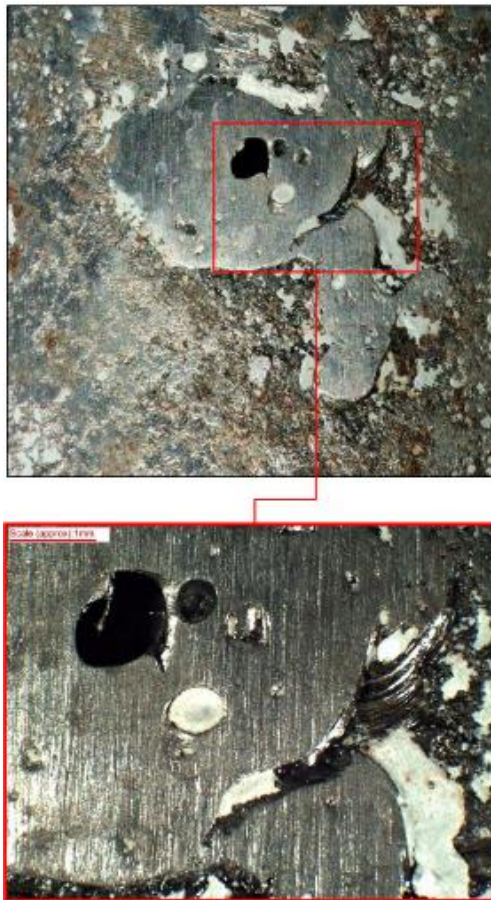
(B): Weld porosity and severe pitting corrosion surrounding the weld
